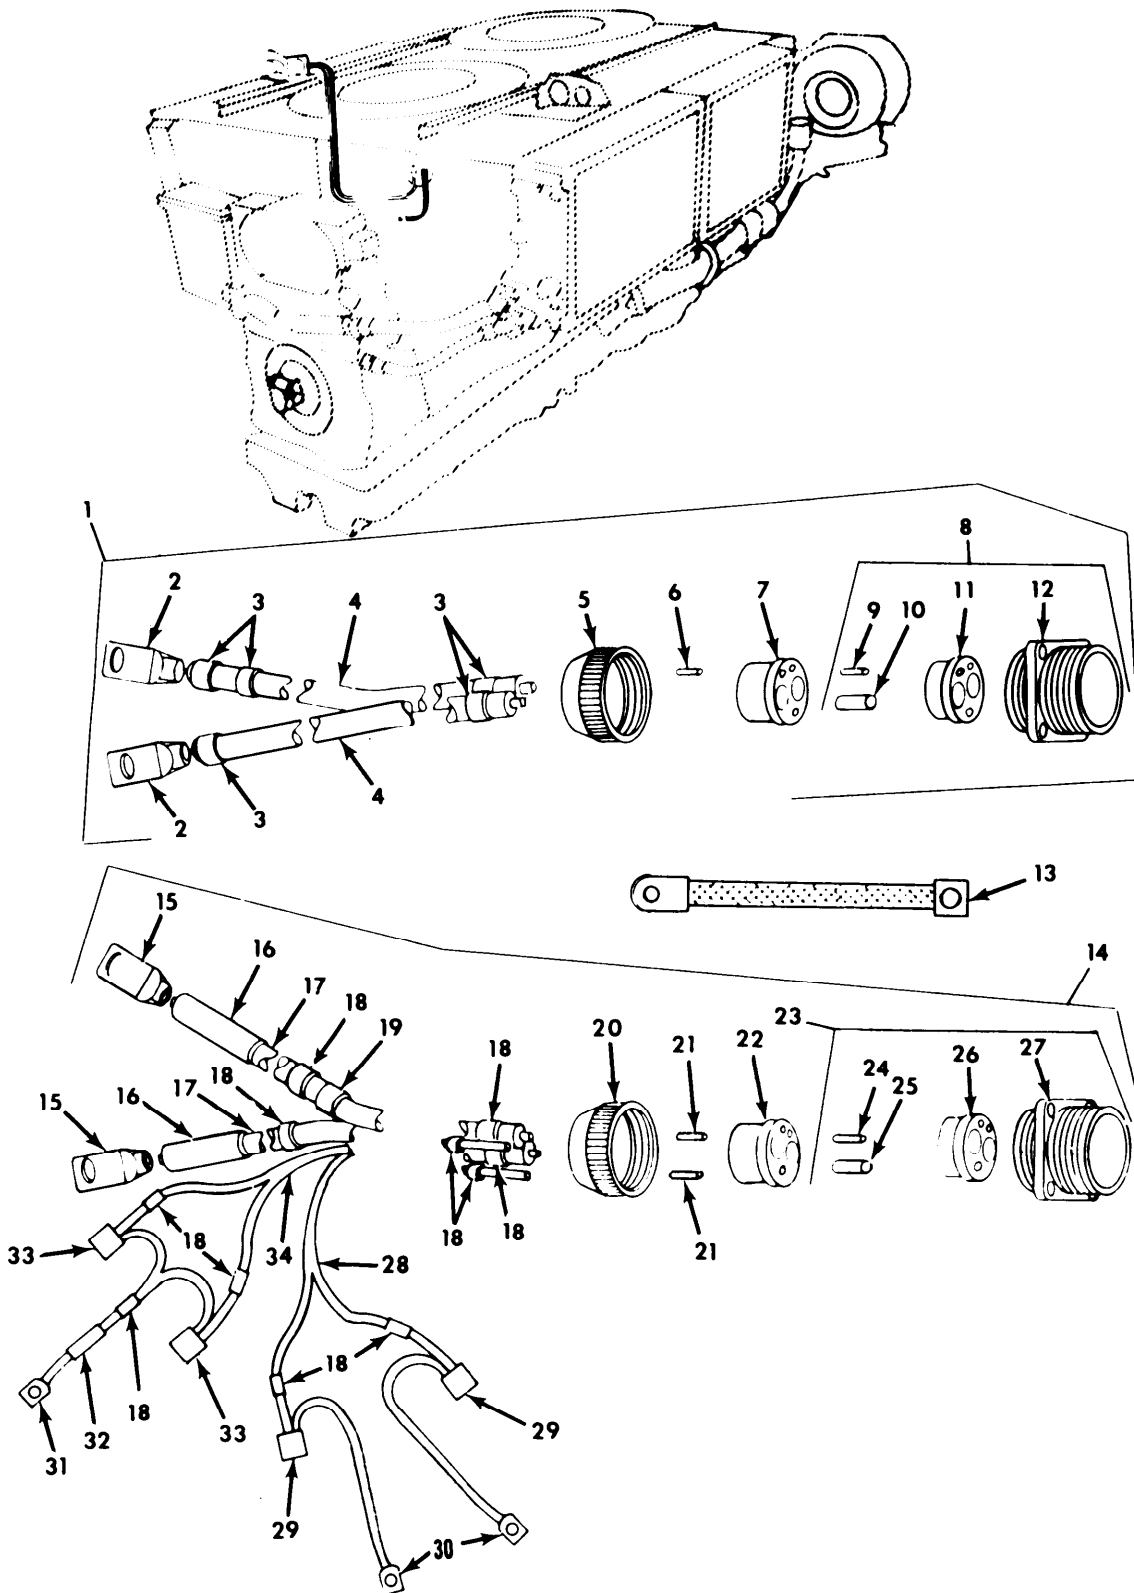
STARTER WIRING HARNESS ASSEMBLY.
